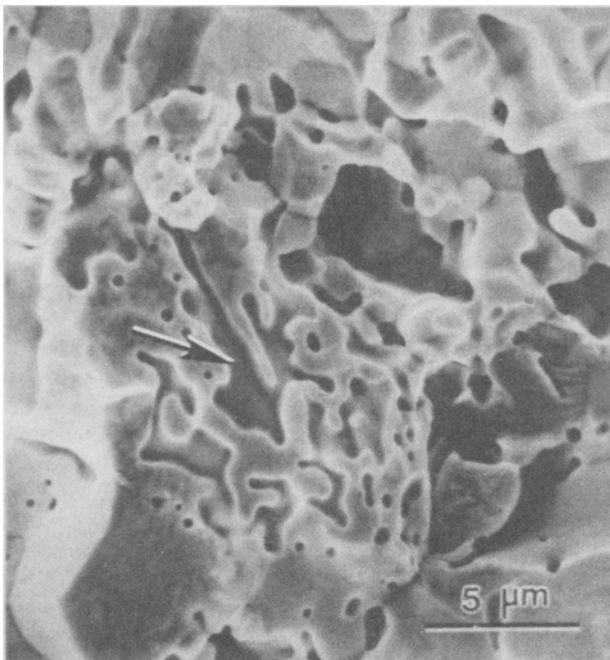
Morphology of the fracture surface showing pores resulting from solidification shrinkage
